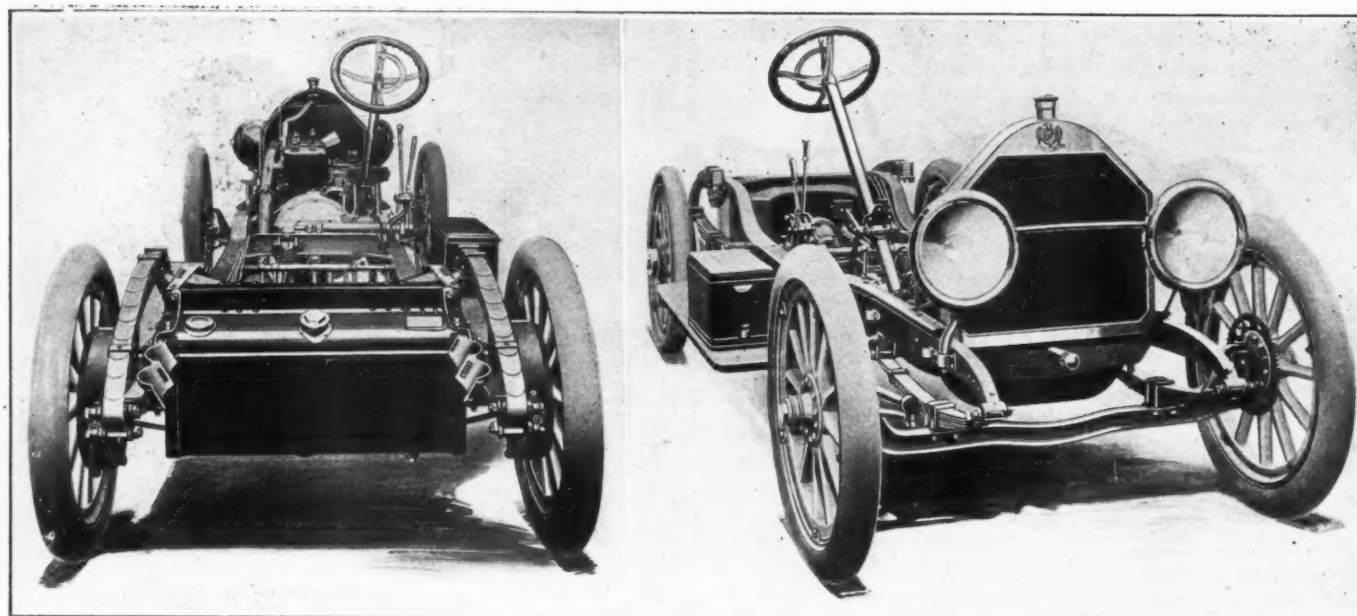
Rear and front view of the standard series eight Cole chassis with pressure tank
